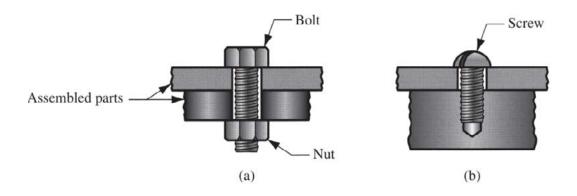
Typical assemblies using (a) bolt and nut and (b) screw
